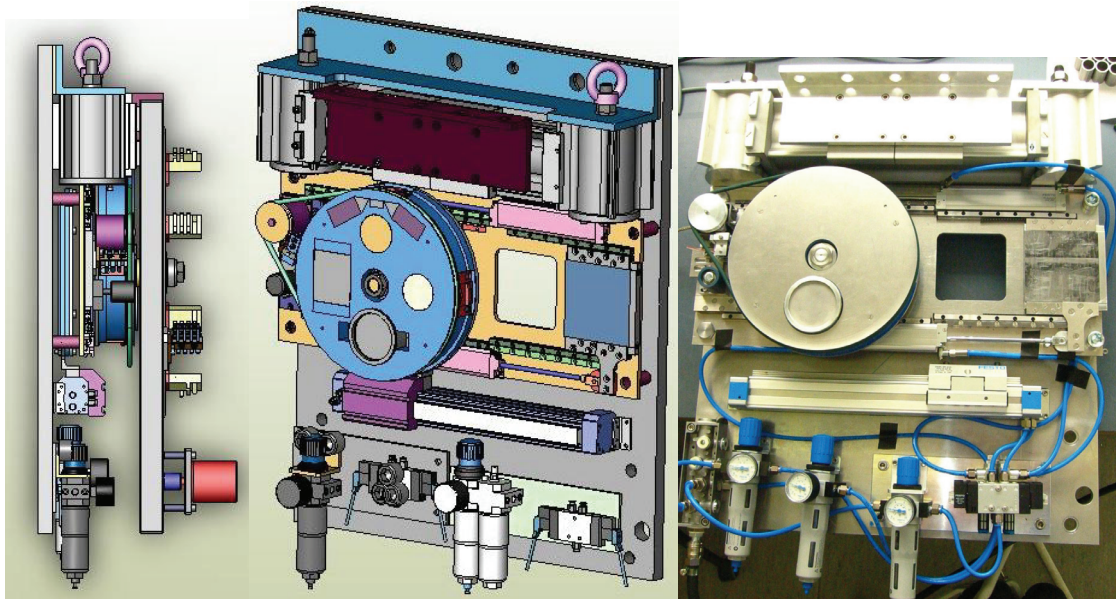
On the left side is shown a side view of the whole package (fast shutter left, multi filter middle, aperture wheel right) and a schematic of the package without the wheel for the apertures. The right hand side shows a photograph of the completed construction.
